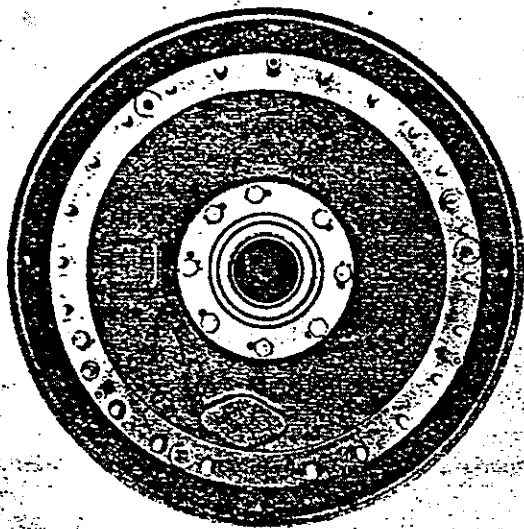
Puller Screws Installed in Power Output Drive Gear Assembly
